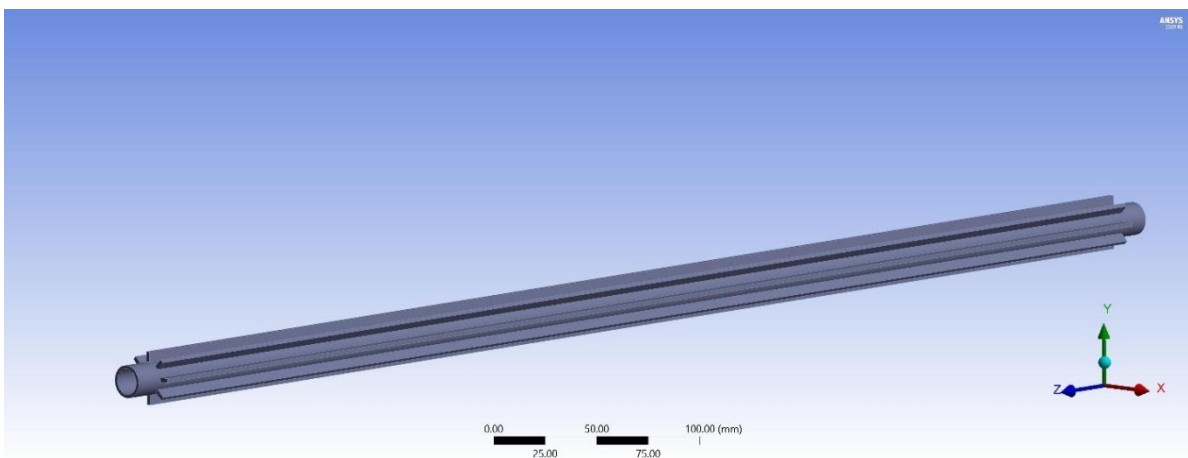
Finite element model of pipeline with longitudinal continuous stiffener of length 670 mm.
